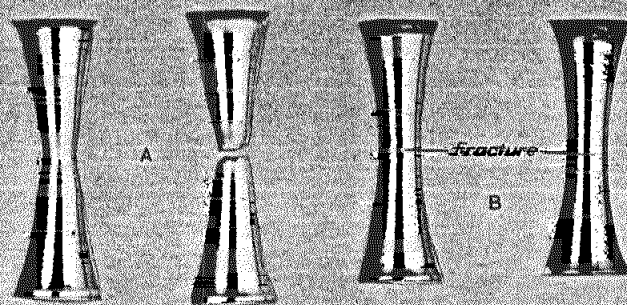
Typical tensile stress fractures in specimens made of SAE 4340 of 32-36R. hardness. —(A) Necking and fracture due to static tensile loads. —(B) Fatigue fractures due to repetitive tensile loading.
